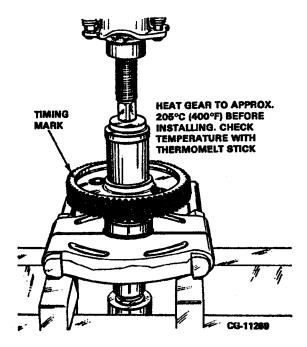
Installing Camshaft Drive Gear CAMSHAFT BUSHING INSPECTION
